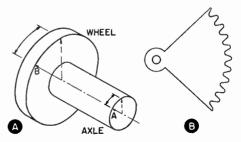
A wheel and axle combination is shown at A. Sometimes only a segment of a wheel or gear is used, as shown at B.
